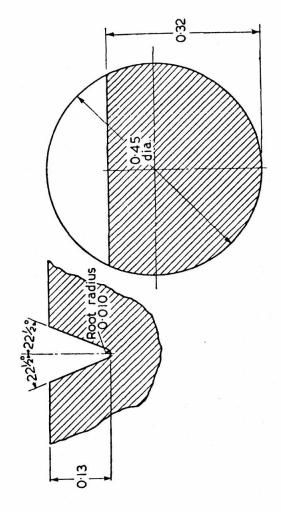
Enlarged section of notch for circular section test pieces Dimensions are in inches unless otherwise stated
